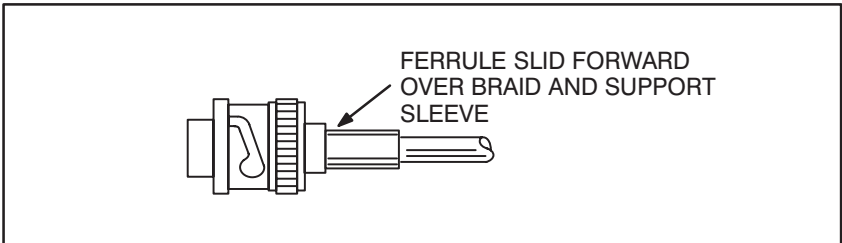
Connector Installation Step 11 for RG-11/U Cable
